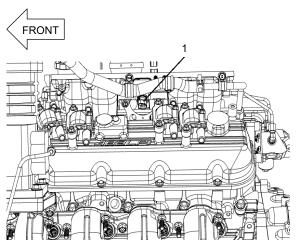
Fuel Pressure/Temperature (FTP) Sensor (1) location on driver side fuel rail
